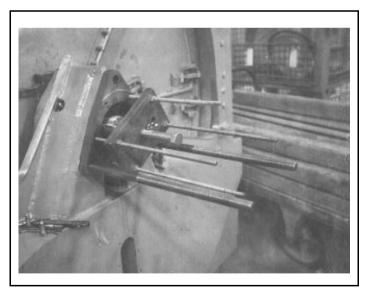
(MSSM0303AE) Bearing Housing Pulling Fixture in Position
